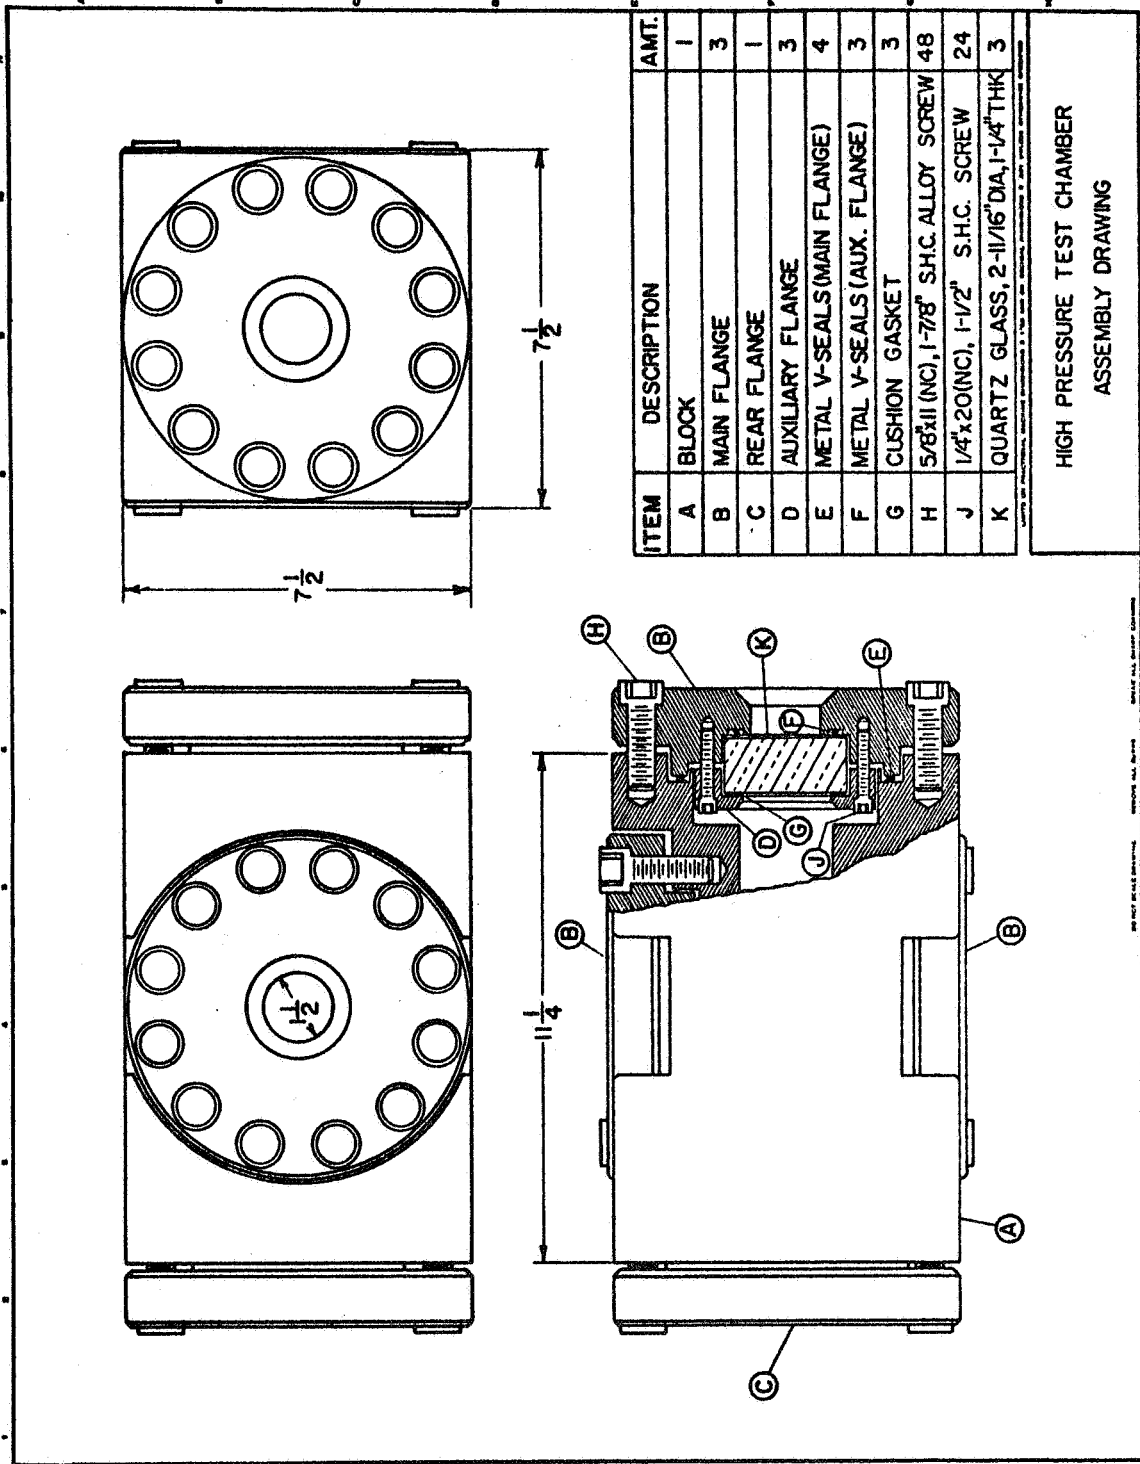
Assembly Drawing of the High Pressure Test Chamber.
